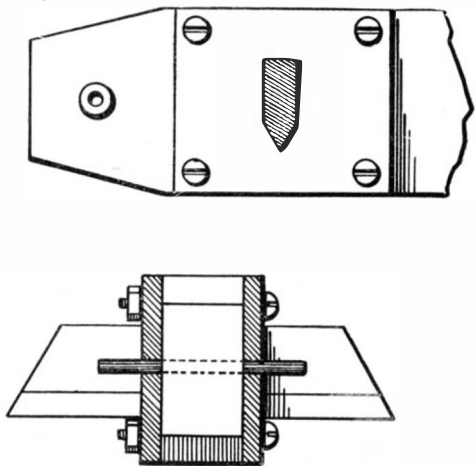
Detail of Knife Edge and the Method of Mounting in the Simple Tin Plate Barometer.
